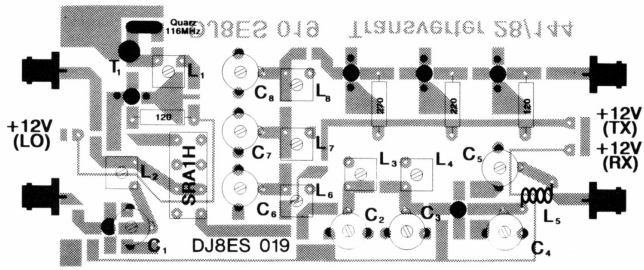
Component layout for the 2m transverter showing the component side of the PCB. The board size is 54 x 108mm
